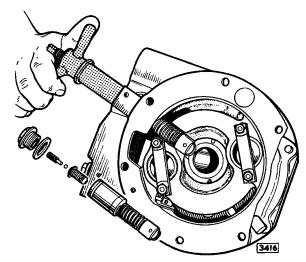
Removing the pump non-return valve. The valve components are shown exploded.
